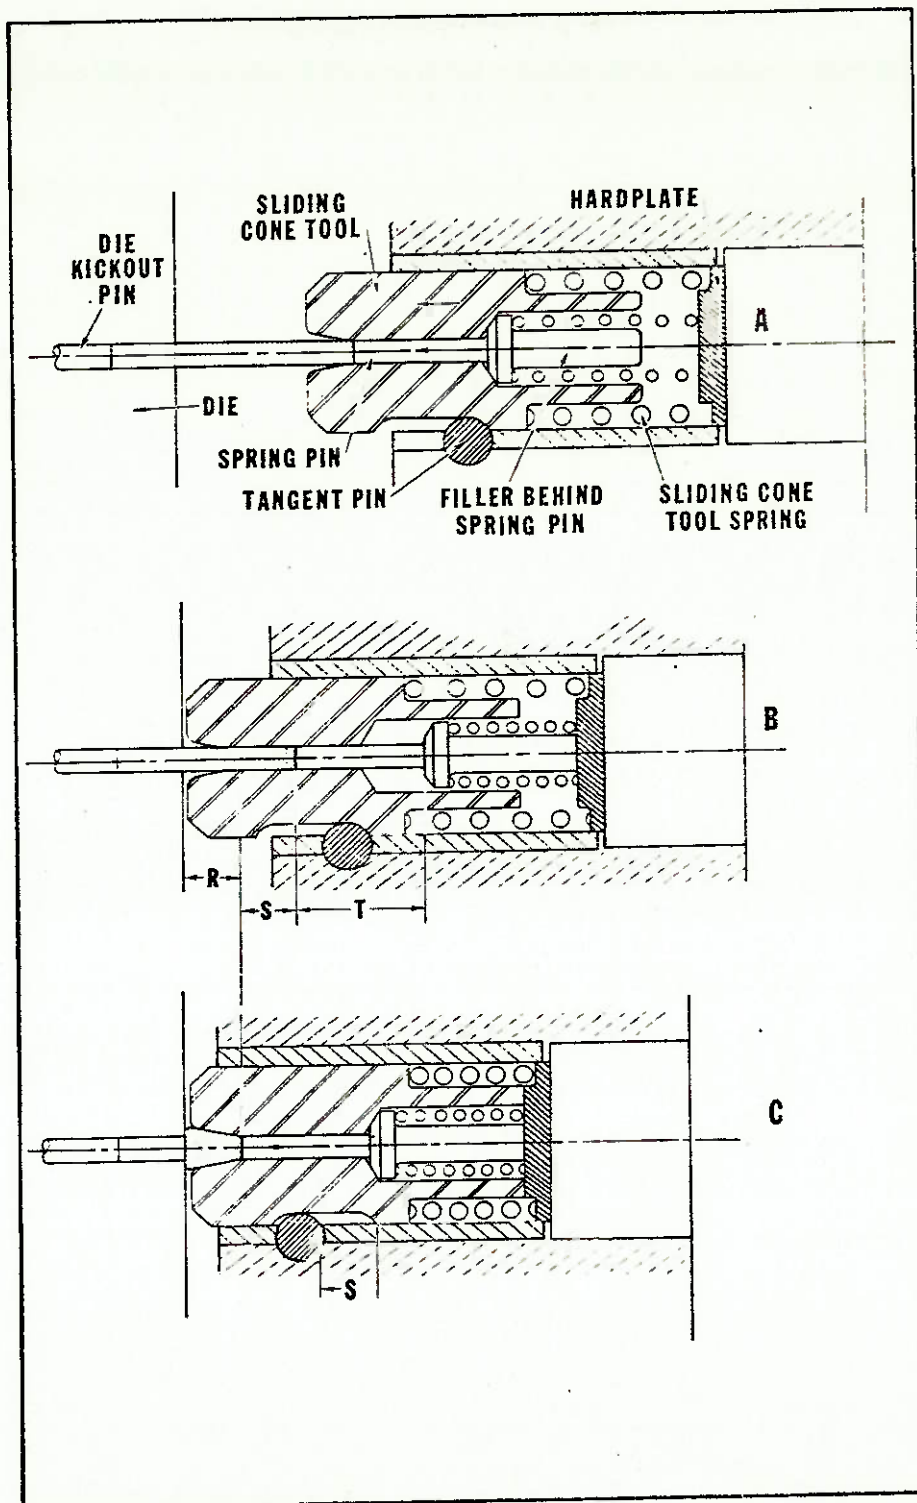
Three steps in operation of a sliding cone tool. In drawing A blank is shown about to be pushed into die. Blank is fully in die and tool (B), and metal flow is about to start. Pin has pushed blank into cone cavity (C) to form the upset.
